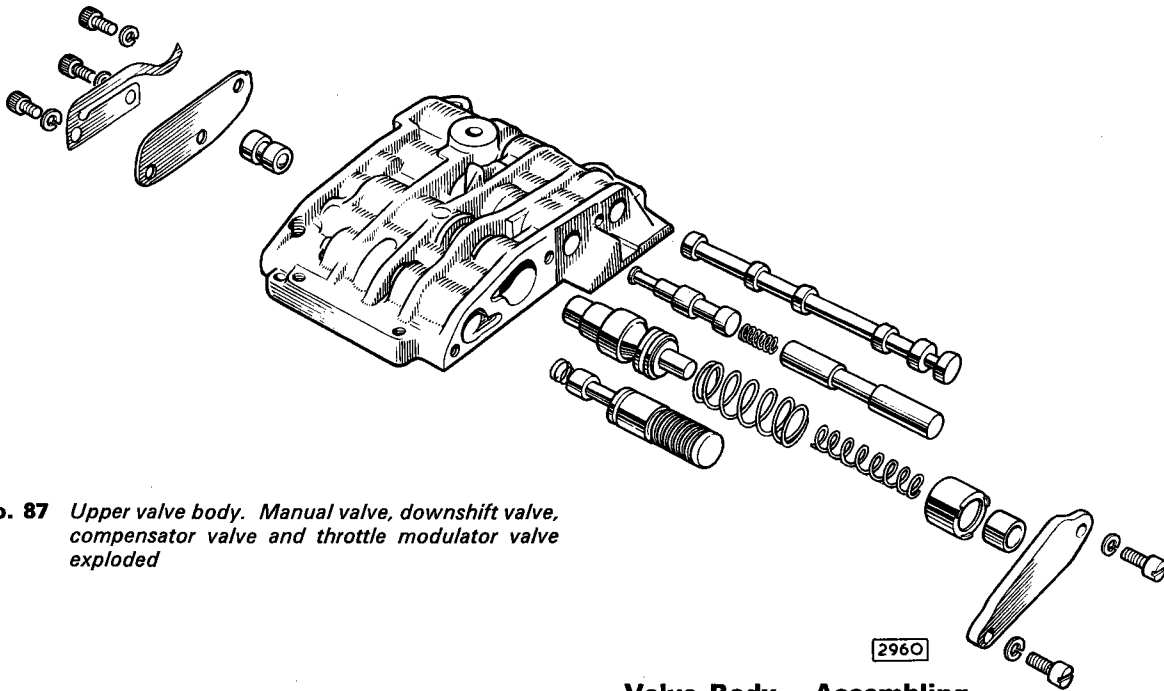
Upper valve body. Manual valve, downshift valve, compensator valve and throttle modulator valve exploded
